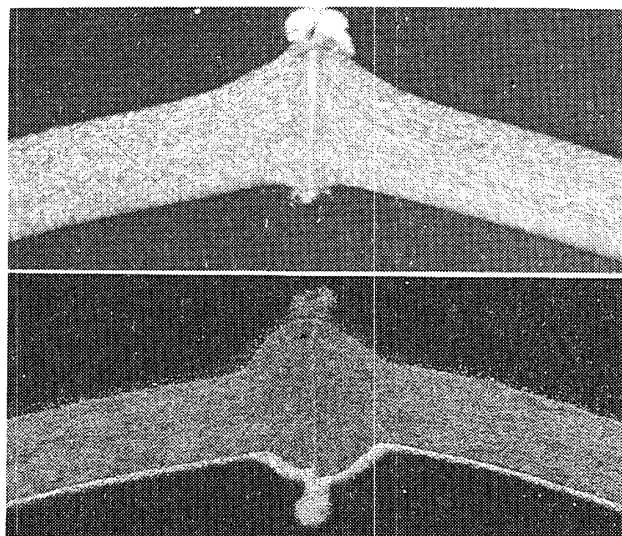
Cross-sectional view of welds, where G.R. = 1.5 mm.
